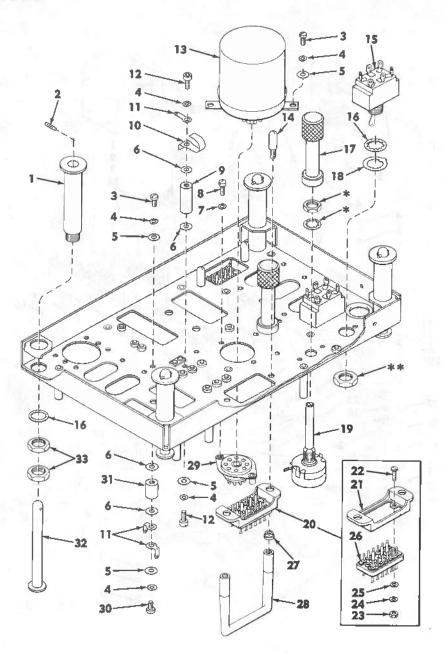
SWITCH AND RESISTOR /8011650/-EXPLODED VIEW /SEE FIGURE 106 FOR NEXT HIGHER ASSEMBLY/
